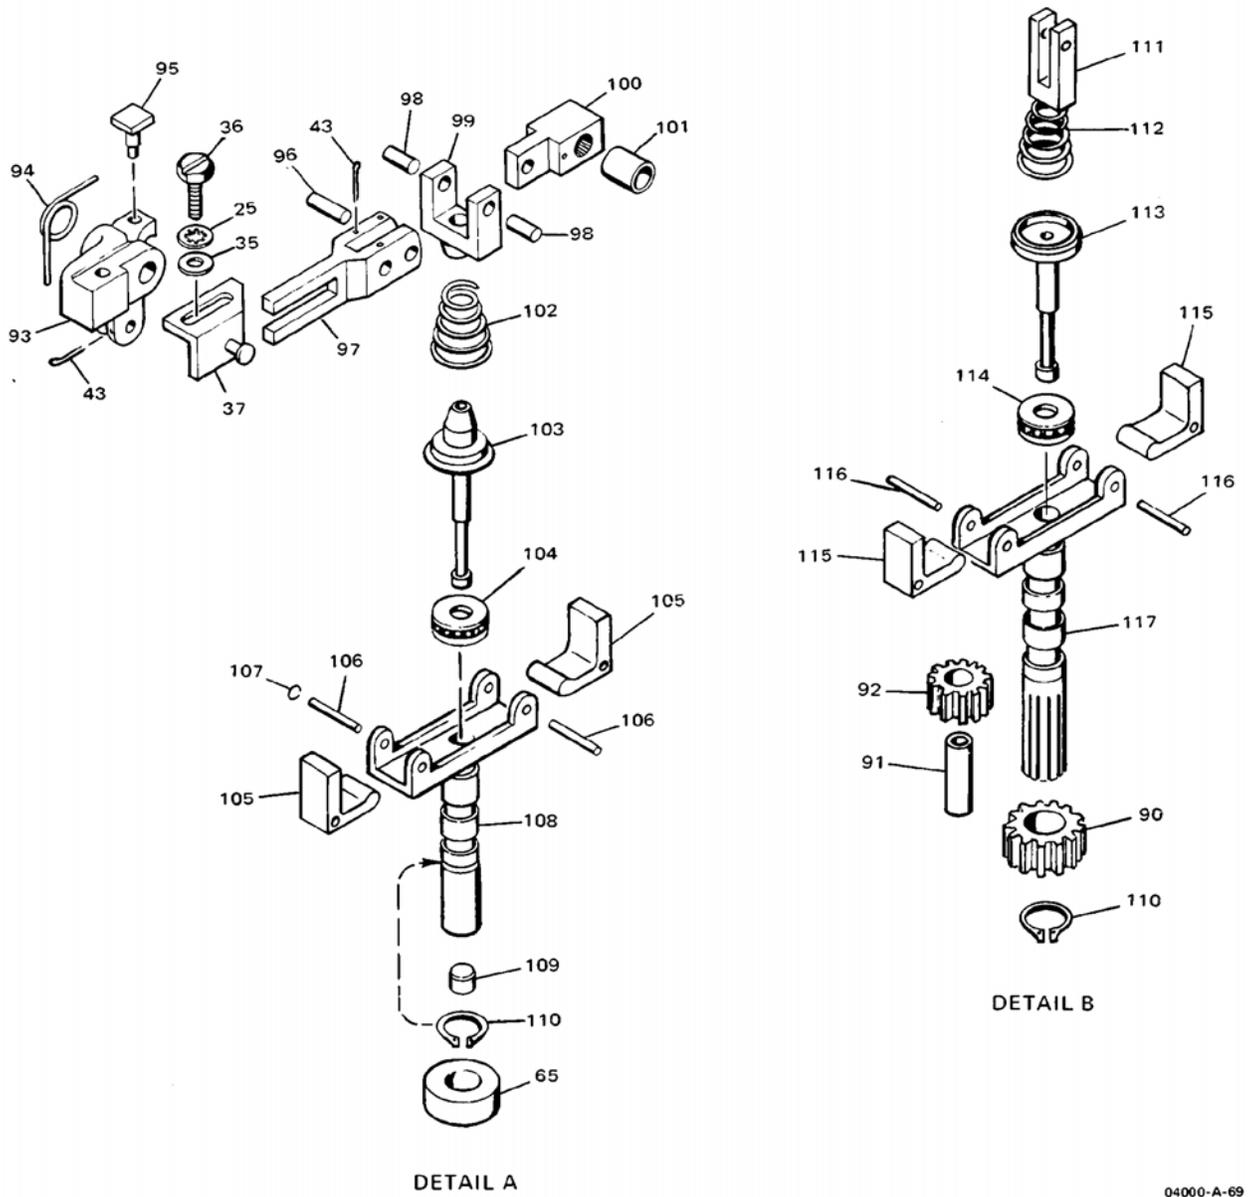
Exploded View of the SGT Torque Converter Governor
